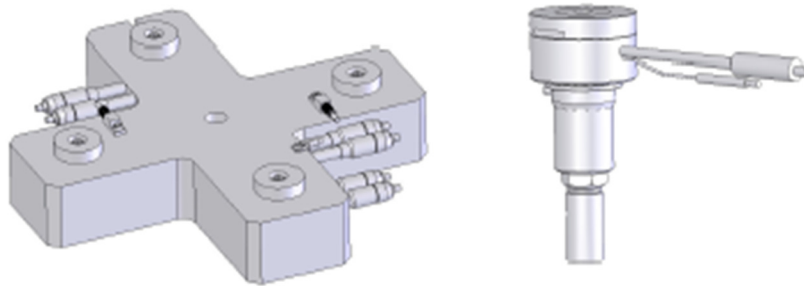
Manifold and heated nozzle (DS, Standard Components, 2008)
